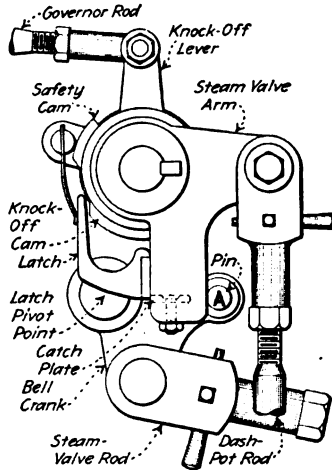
Gravity trip gear of Murray Corliss engines. (Murray Iron Works Co.)
